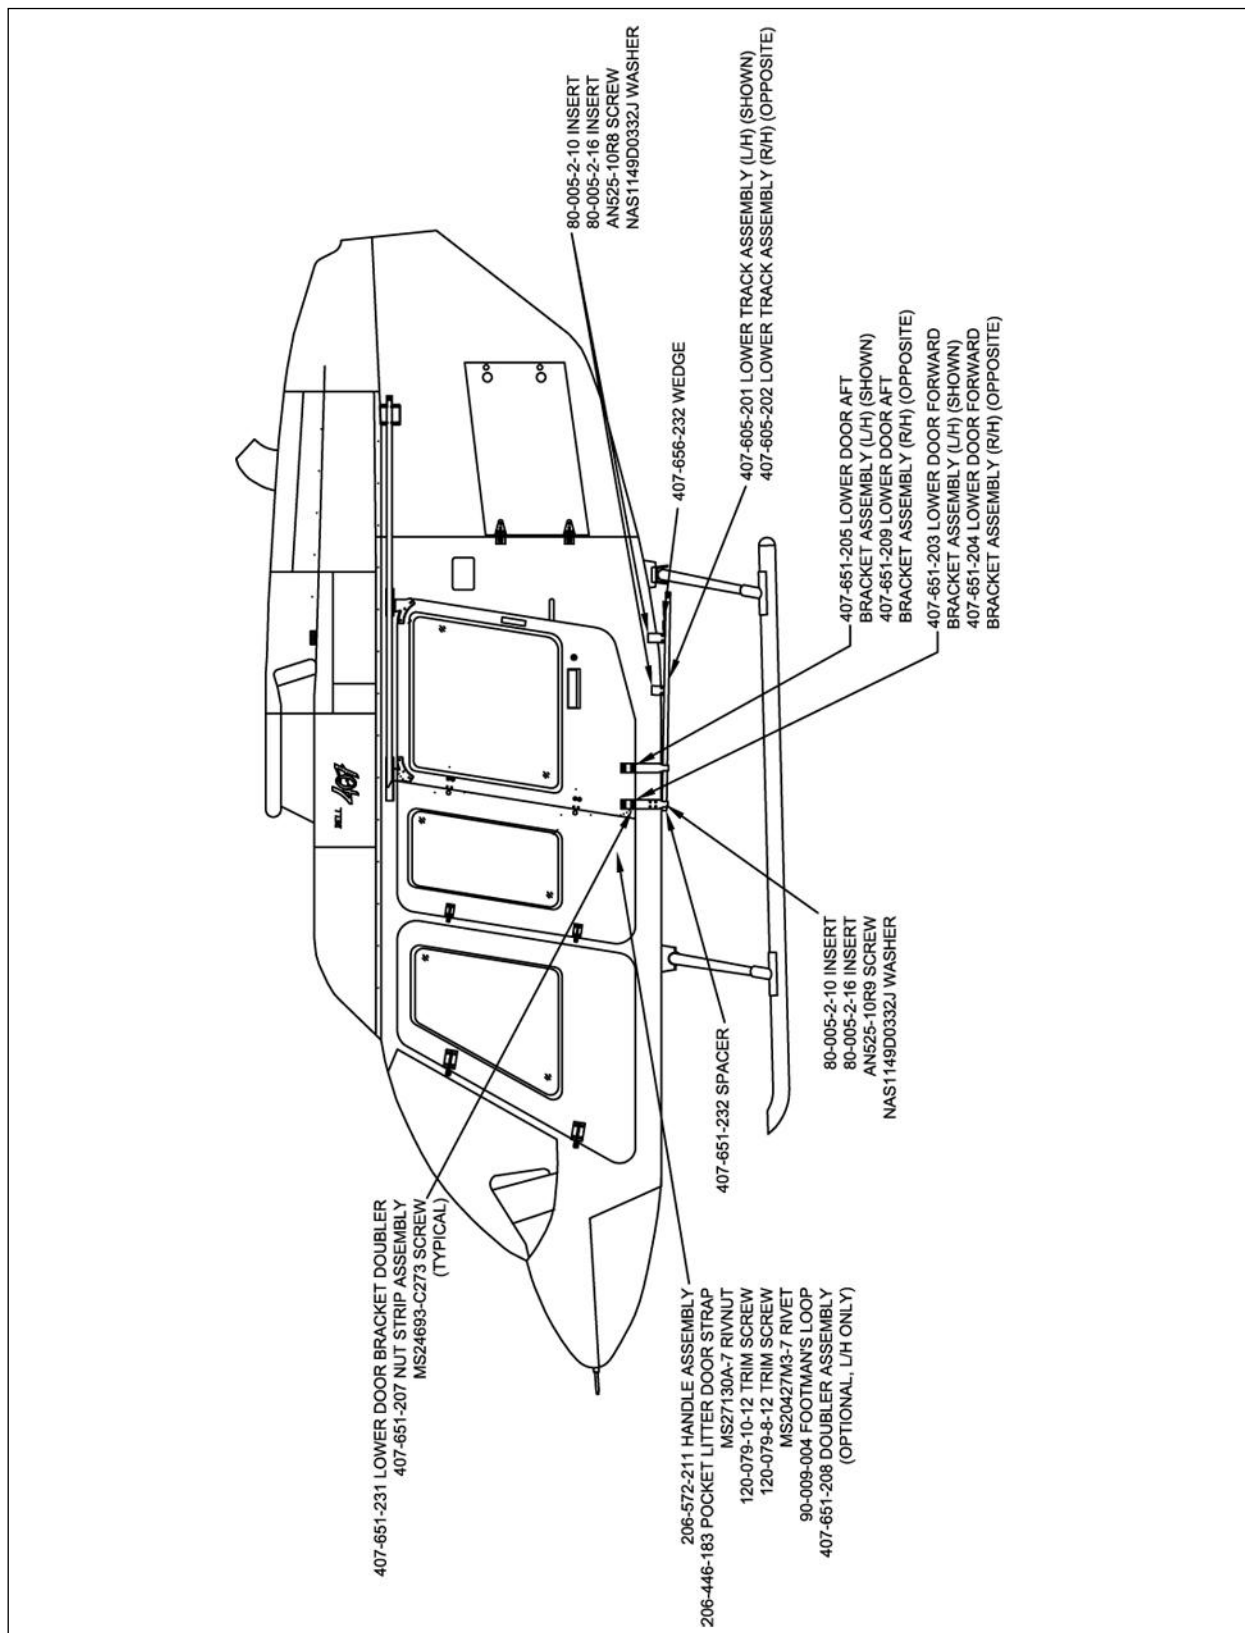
(SHEET 2 OF 2). PASSENGER SLIDING DOOR KITS
